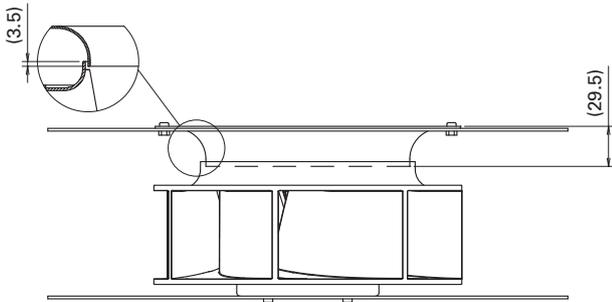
Example of the "San Ace C225" 9TS type and inlet nozzle mounting dimensions (unit: mm)
